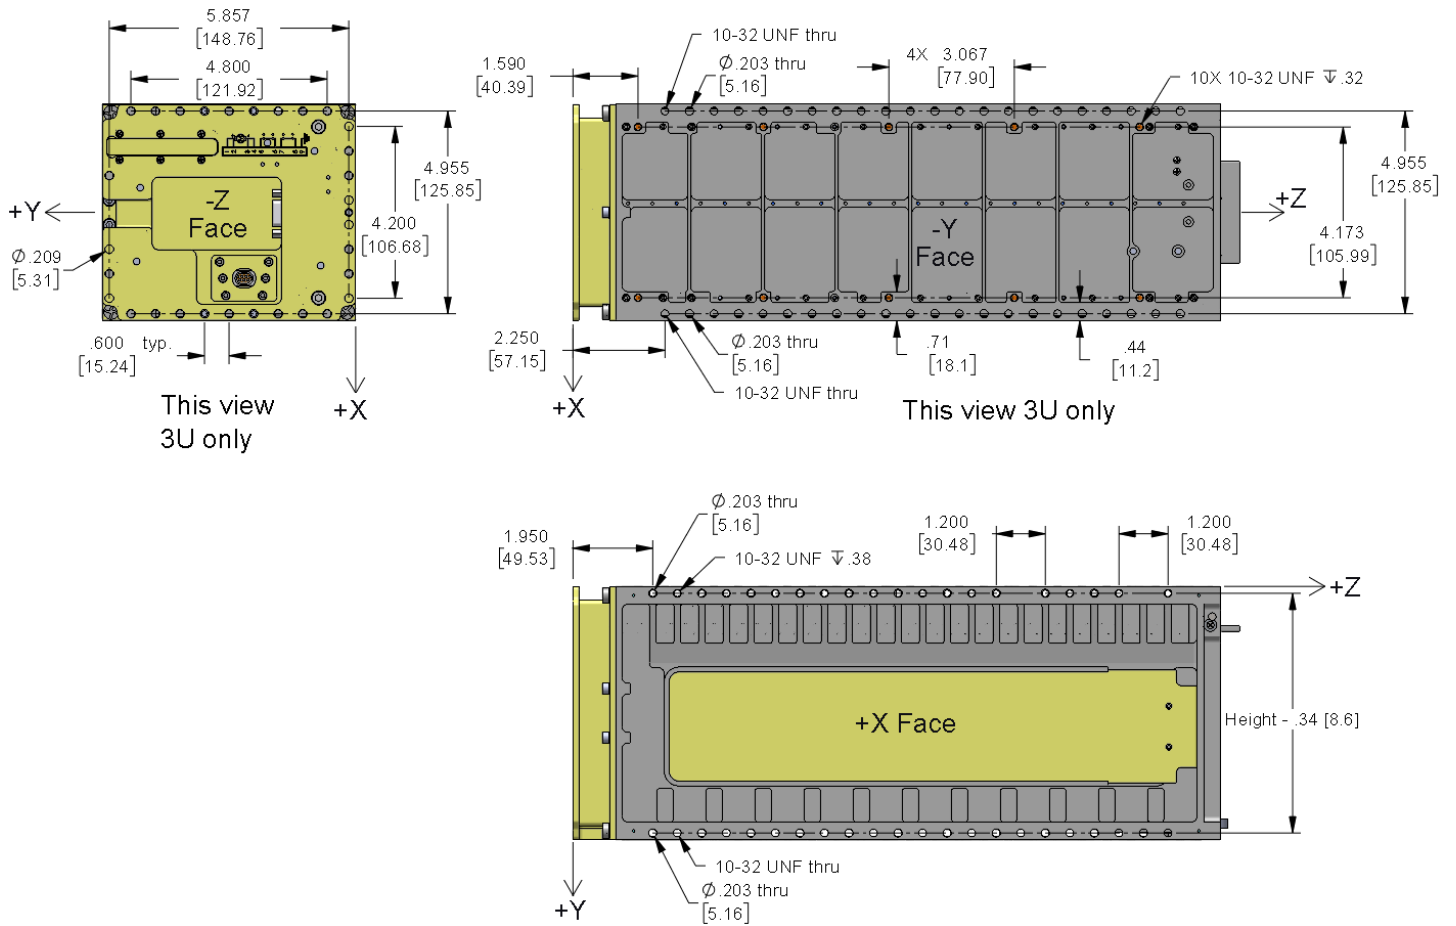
Mechanical interface dimensions (cont.). Some views unique to 3U.
